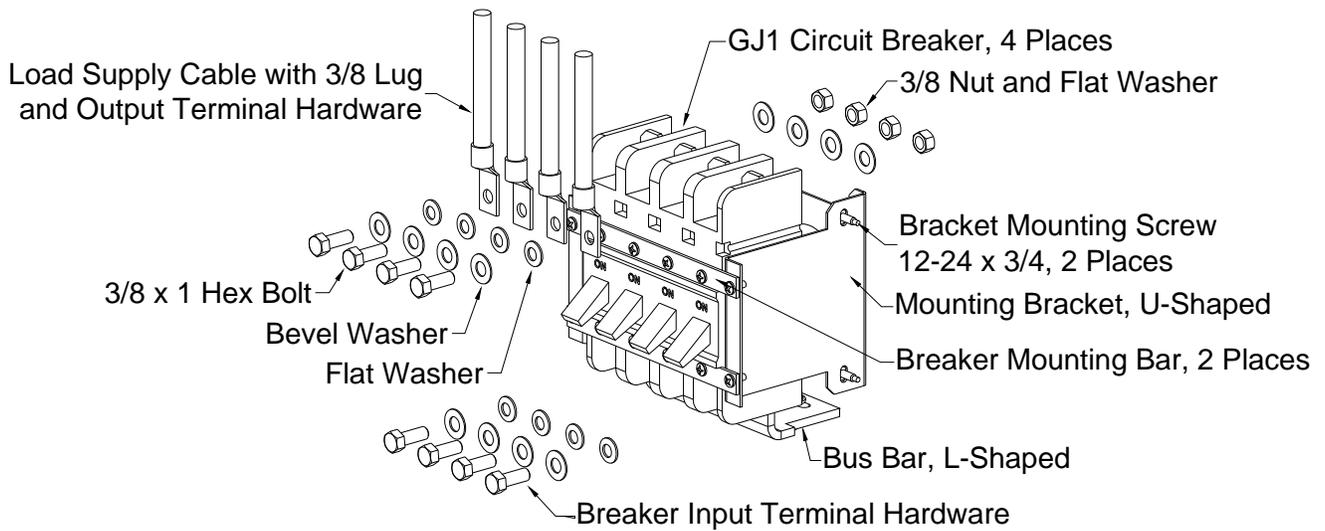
GJ1 TYPE BREAKER KIT COMPONENTS
